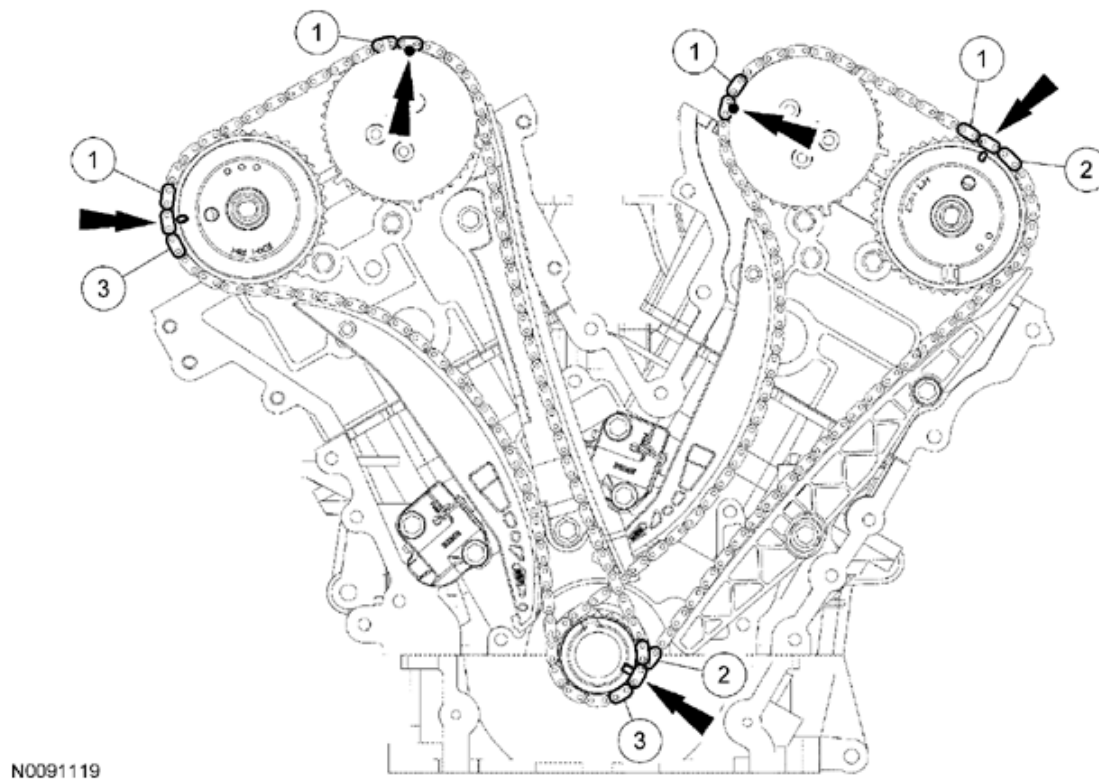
Identifying Camshaft And Crankshaft Timing Marks Location
